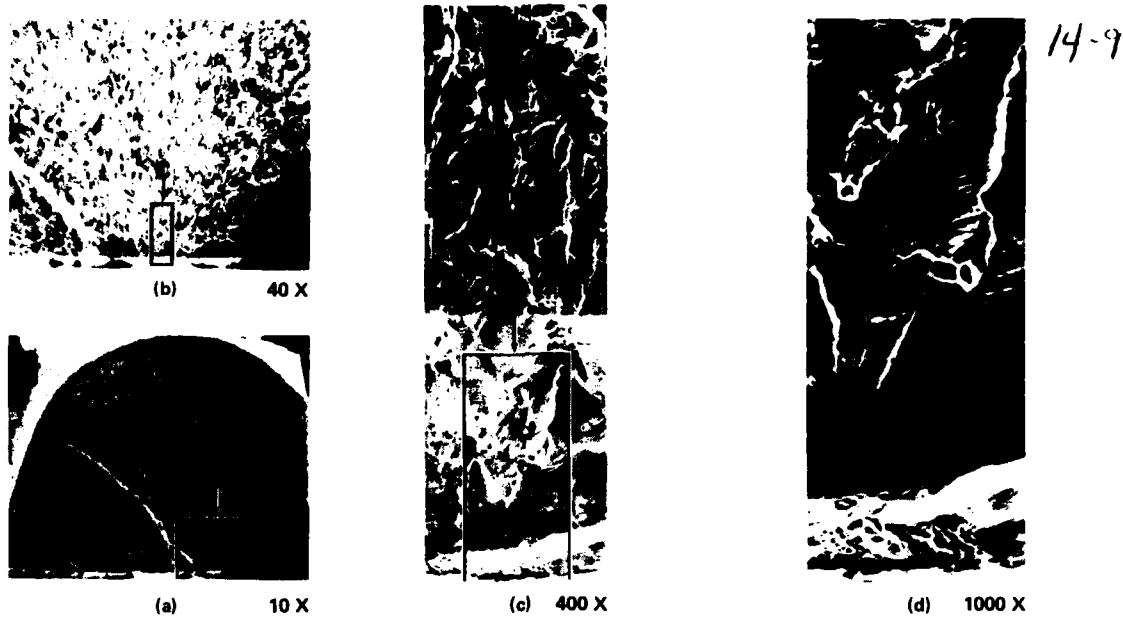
FOUR-VIEW OF A FATIGUE CRACK GROWTH PLANE AND MARKERS FROM AN ORIGIN IN A 0.250-IN. (6.35-mm) 2024-T3 COUNTERSINK HOLE WITH CLEARANCE FIT SCREW
